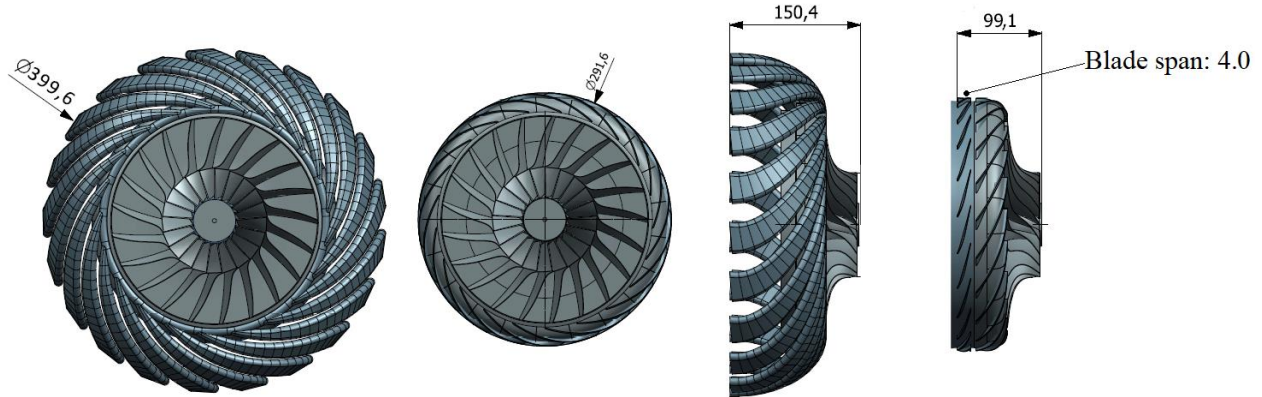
Axial and meridional views of CC compressor and new CRC compressor (all dimensions in mm)
